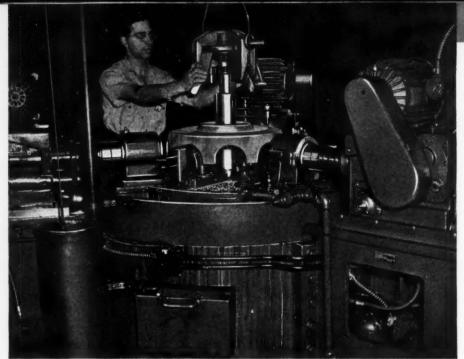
(Left) Three Locating Spots are Bored in the Cylinder Openings of Crankcase Forgings in a Three-spindle Machine Equipped with Target Gages, Indicators, and Equalizing Blocks
